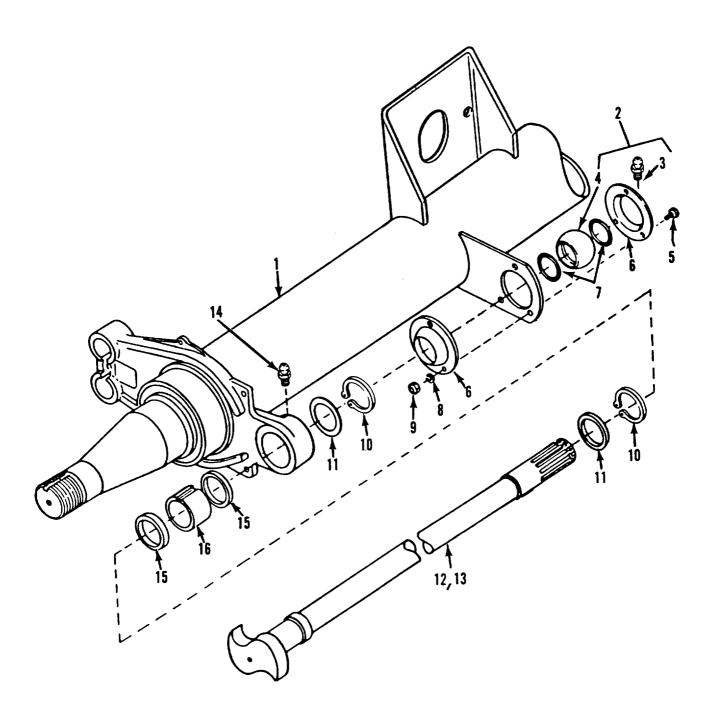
AXLE ASSEMBLY (USE ON PAO1UX THRU PAO21W).
